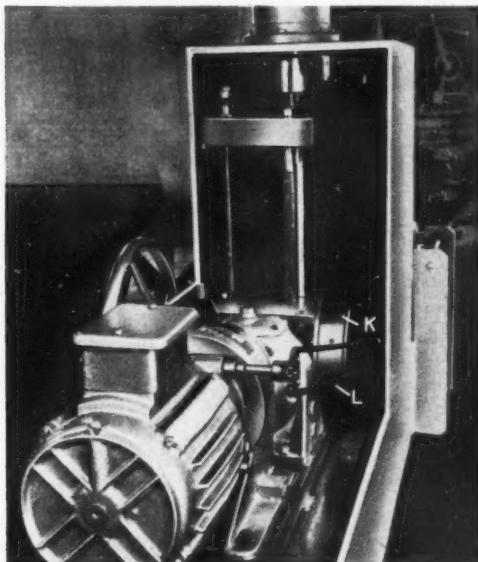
In this View of the Head with the Covers Removed, the Rack for Traversing the Quill Downwards, and the Drive, which Incorporates a Kopp Variator, can be Seen
